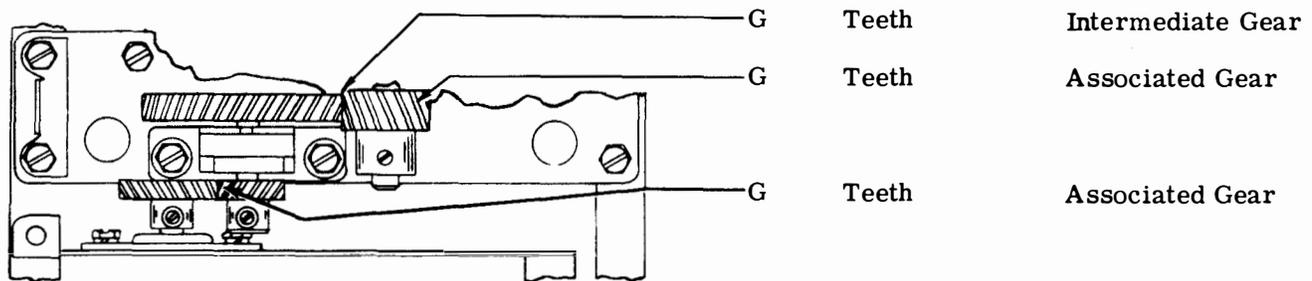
Intermediate Gear - Multicontact Single Mounting Bases
